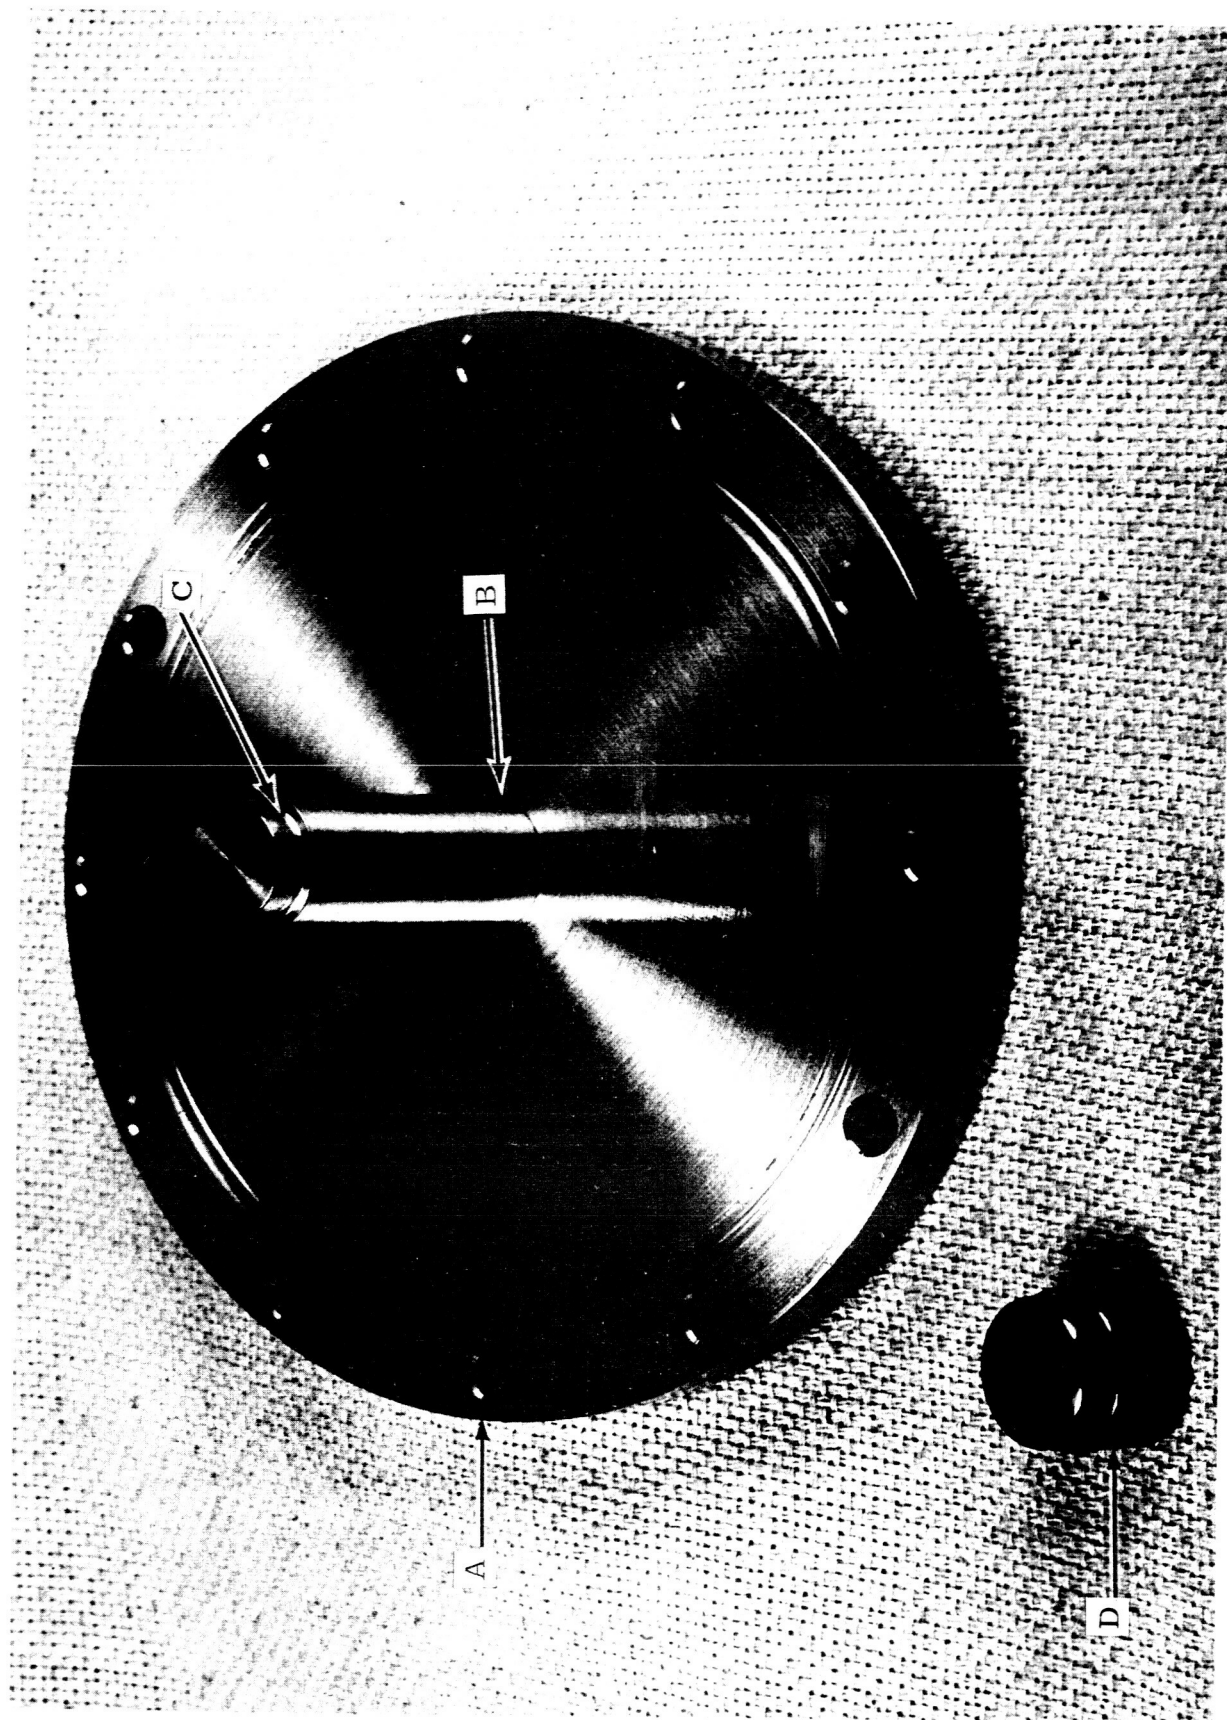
TOP VACUUM FLANGE, ELECTRODE AND CONTACT ASSEMBLY
